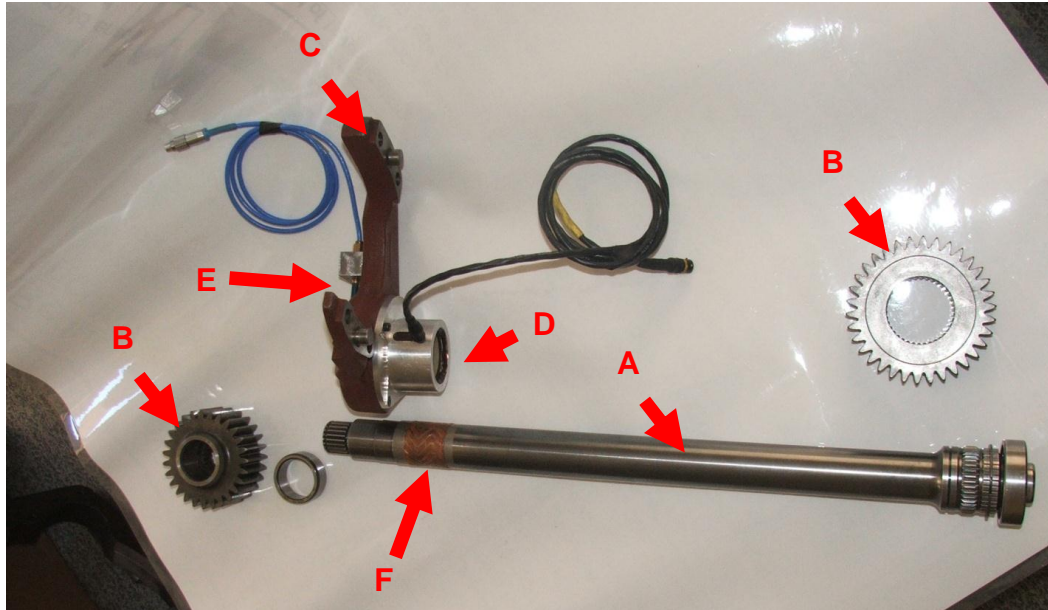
The internal front wheel driveshaft (A), drive gears (B), bearing carrier (C), Torductor housing (D) and speed sensor (E). The copper chevron of the Torductor sensing region (F) is visible on the left hand end of the shaft. (Source, author)
